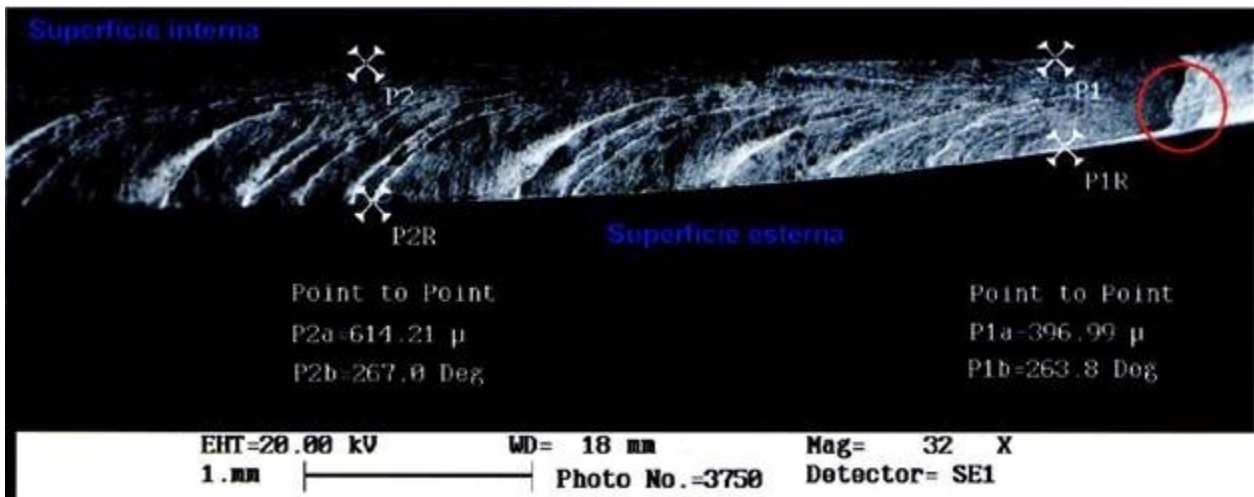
SEM image, wide view of fracture surface (Courtesy of Leonardo)
